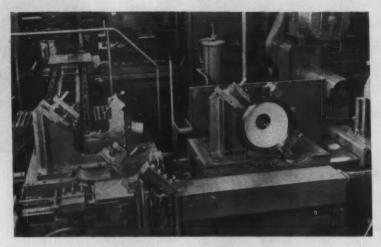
Details of the fixture-pallets on machine shown in Fig. 1 can be seen in empty pallet at left. A raw casting has been loaded and clamped in fixture at the load-unload station
